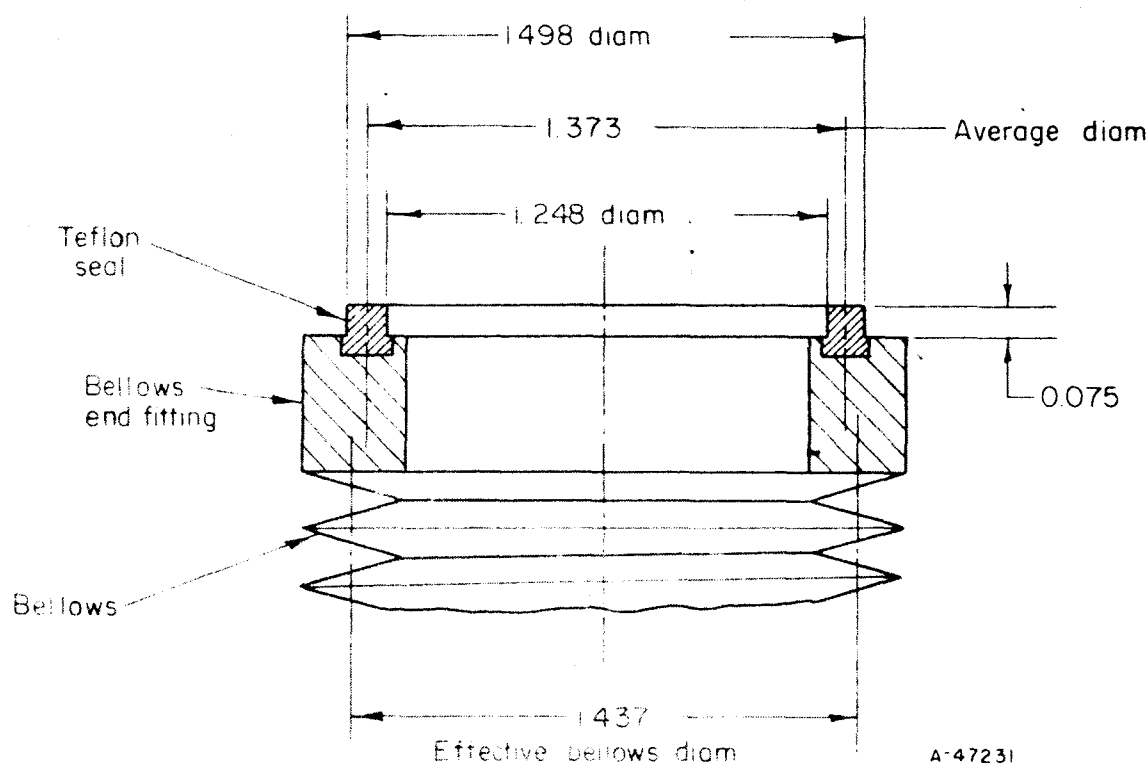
SEAL-INTERFACE DIMENSIONS
